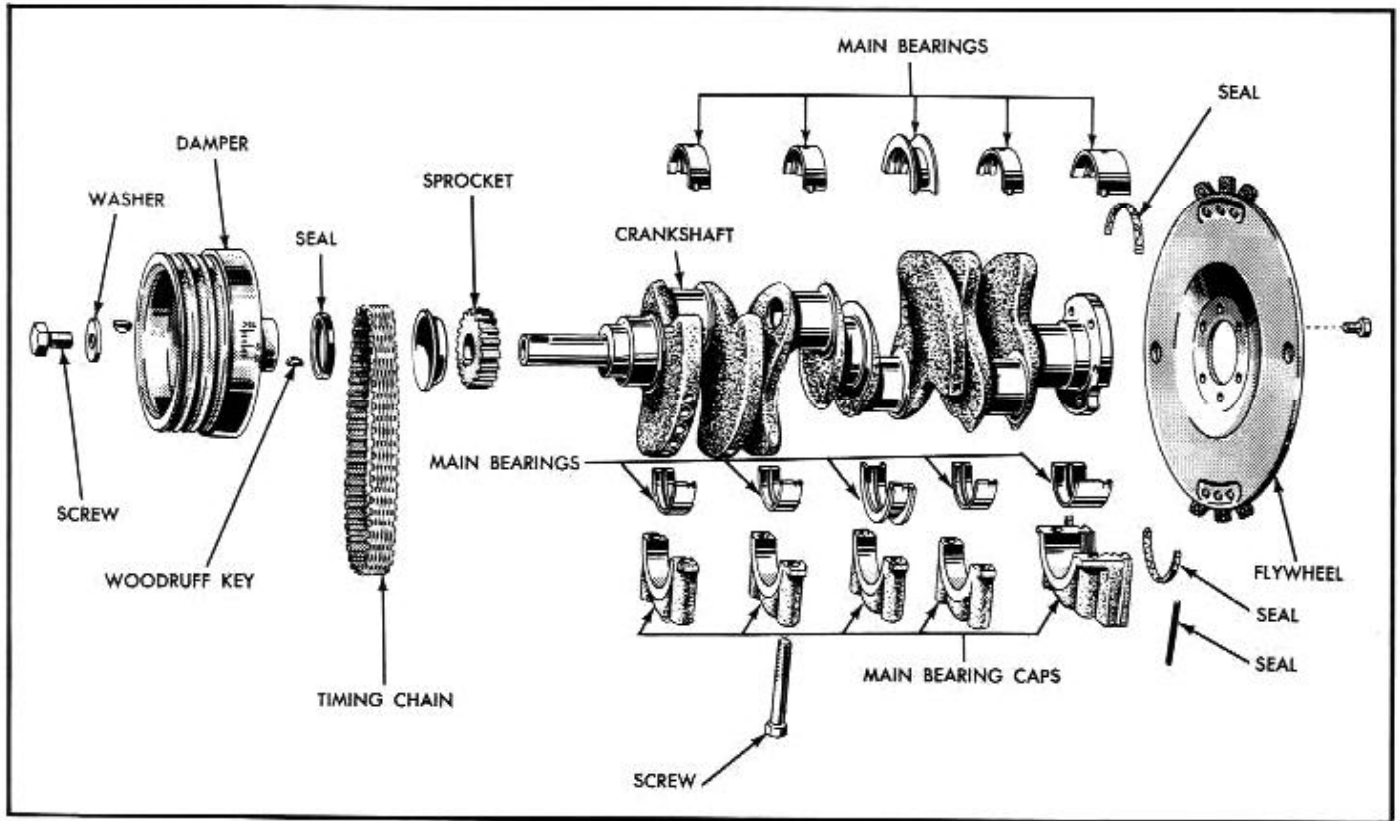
C-134—Crankshaft, Flywheel and Related Parts
